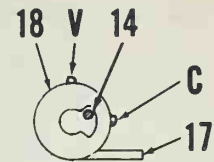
Position short end of spring (17) in slot (V) of spring retainer on variable speed engines or in slot (C) on constant speed engines.
